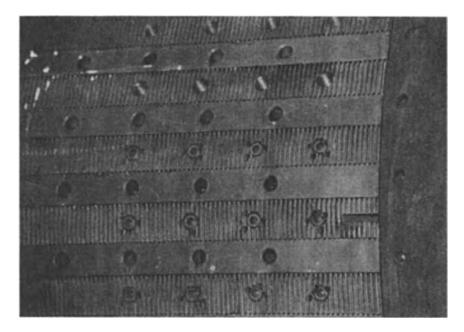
[R09] A turbine generator's rotor having a single wedge per slot. In this machine, the wedges are designed to touch the retaining rings.
